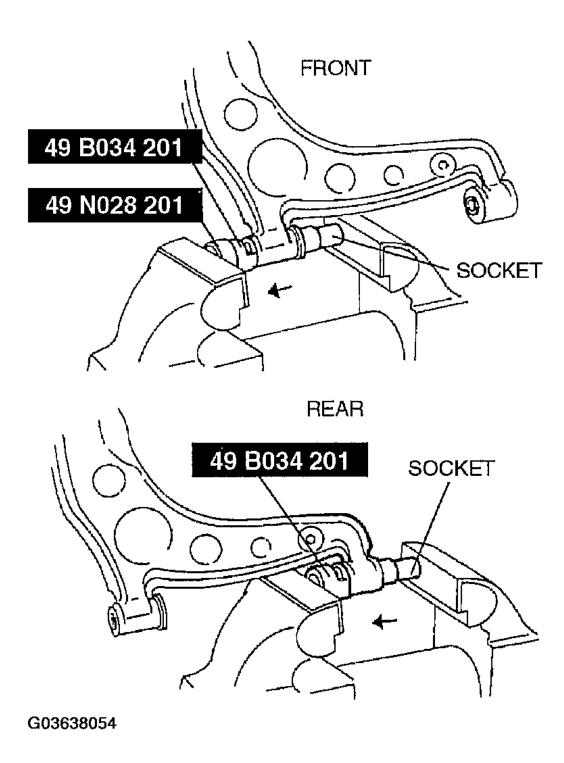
Pressing Lower Arm Bushing Out Using SSTS And A Socket Courtesy of MAZDA MOTORS CORP.
